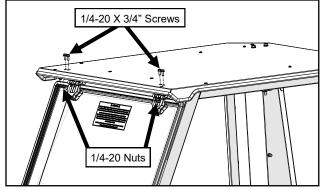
(Hinge Sleeve to Roof Fasteners)
